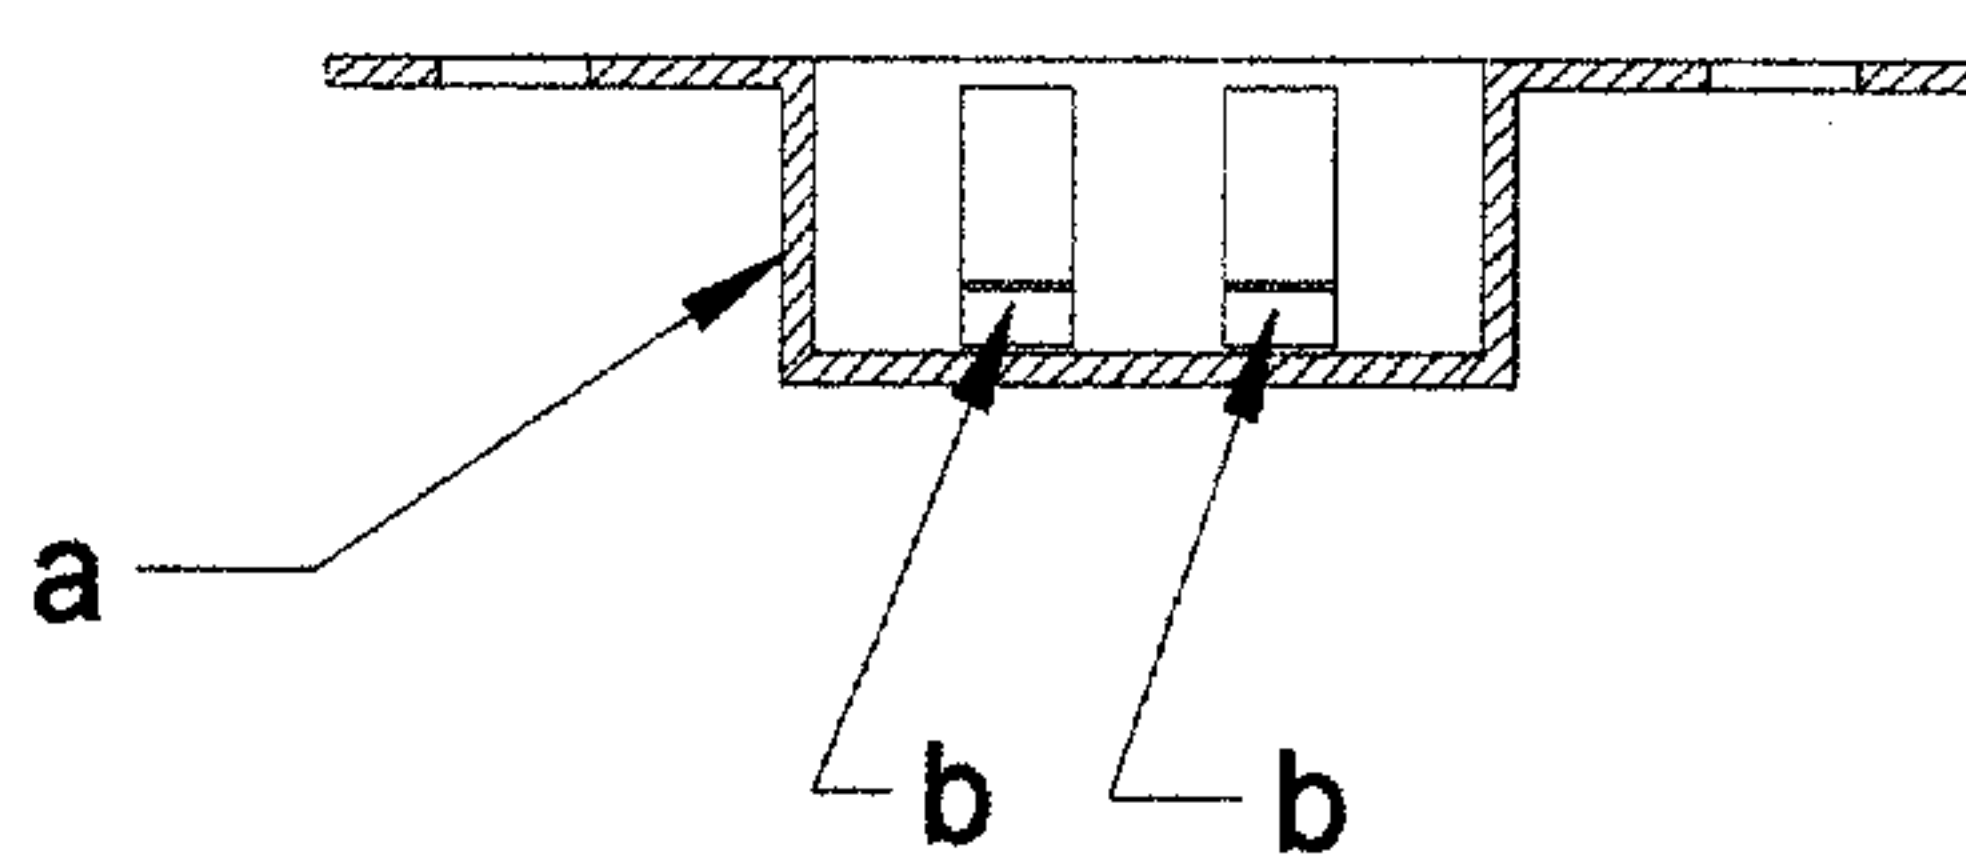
FRONT SECTIONAL VIEW X-X
